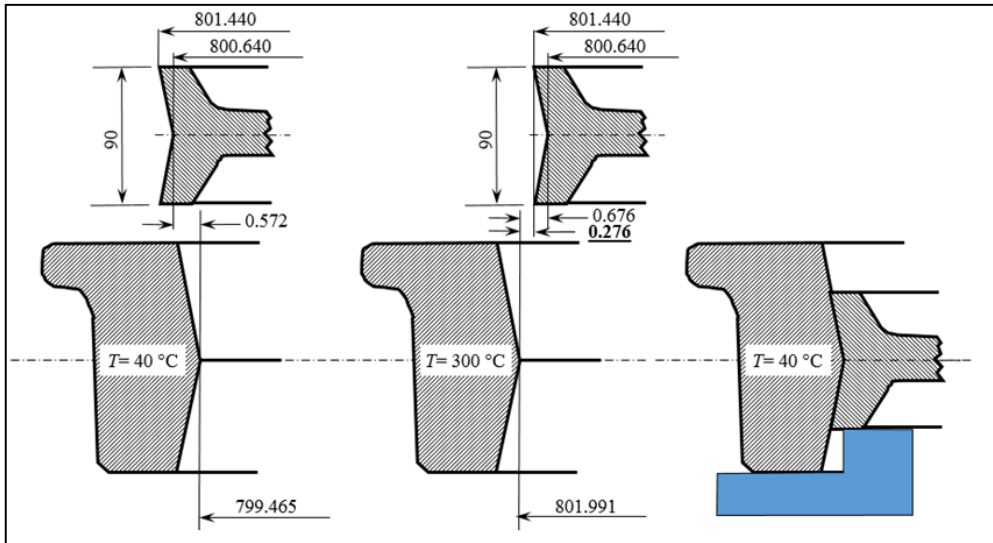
Relative position of coaxial wheel centre and tyre with 800 t7/S8 coupling in cold (right) and hot (centre) conditions. Enough radial play for mounting of 0.276 mm is obtained even with the maximum radial interference of 0.572 mm. Right: simple tool to guarantee the respect of geometrical tolerances after fitting.
